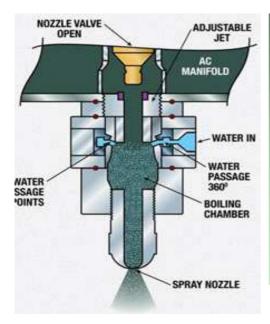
Cross-sectional detail of the foam injection nozzle (Astec)
